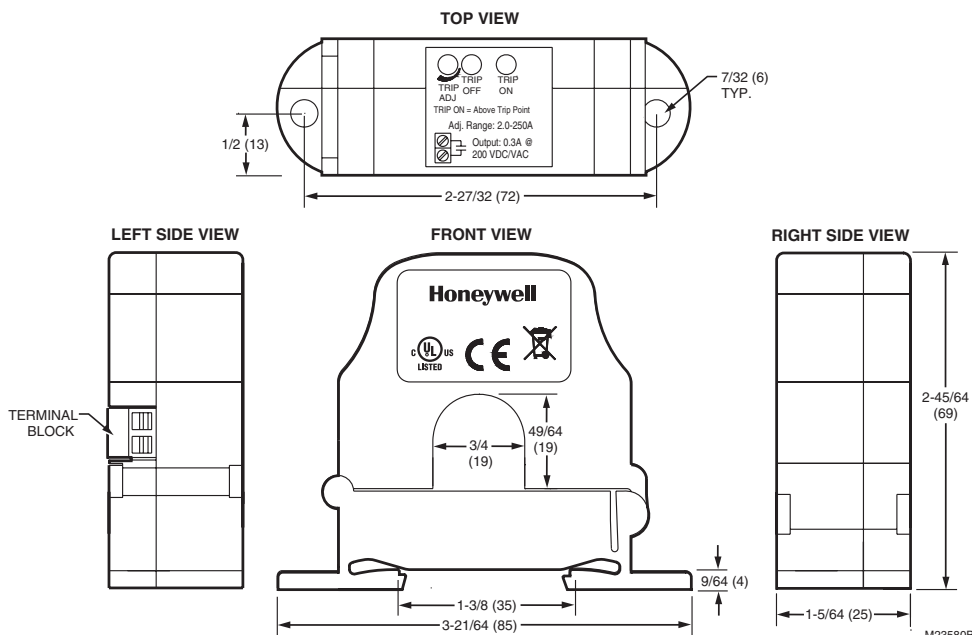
CSP Current Sensor Dimensions in Inches (mm).
